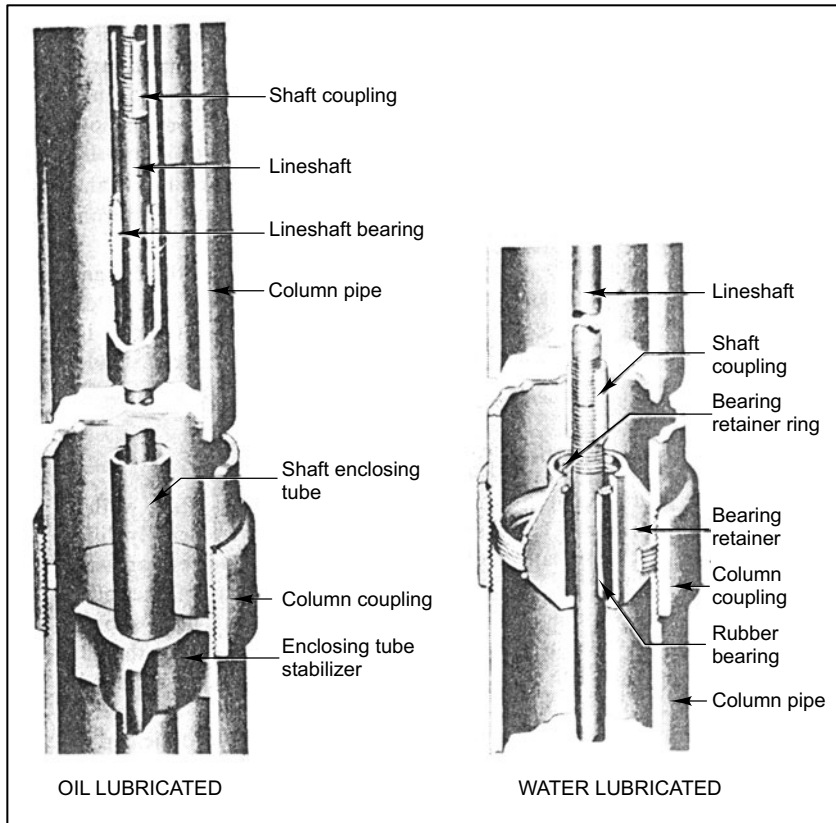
Cut-away views showing the details of the column assembly of oil-lubricated and water-lubricated vertical turbine pumps
